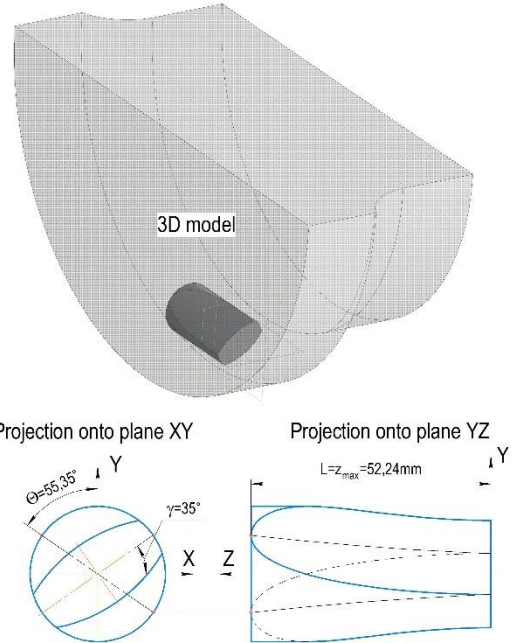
Geometric 3D modeling of workpiece gripping by roll using CAD program
